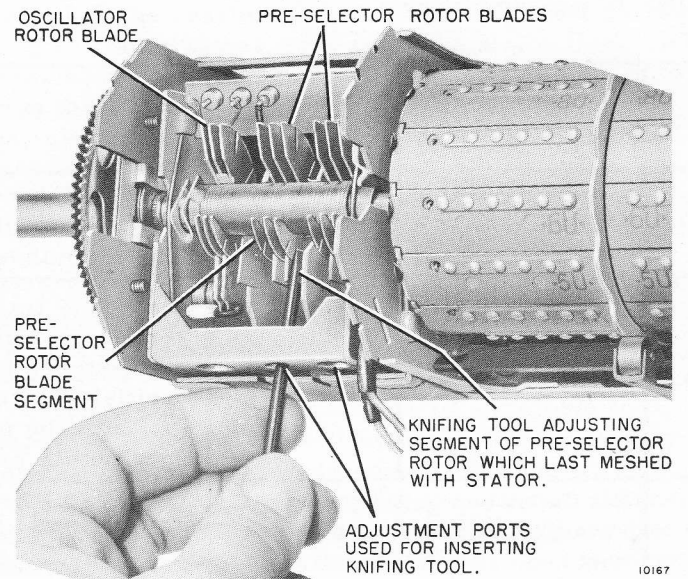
View of VHF-UHF Tuner Showing Method of Aligning (Knifing) Rotor Blades in UHF Section.
